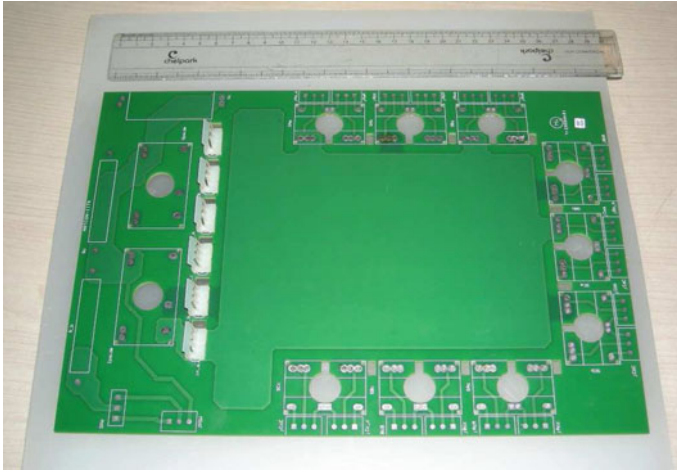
PCB housing the power stage and also the clamp protection circuit
